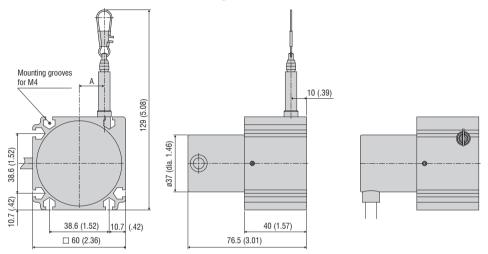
Dimensional drawing WDS- ... - P60 - CR - P, dimensions in mm (inches)
